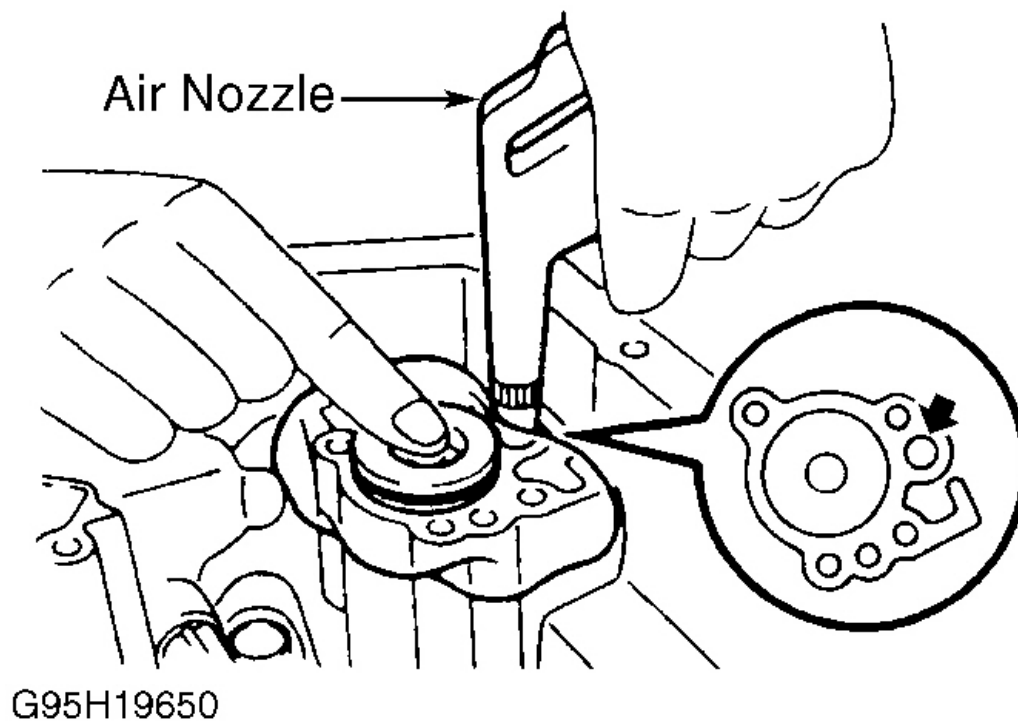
Removing Underdrive Clutch Accumulator Piston & Spring
